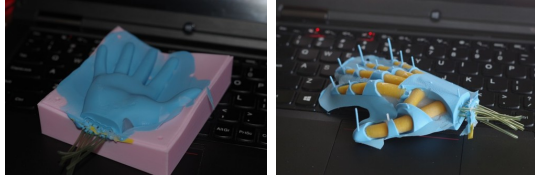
Main mould open and demoulded hand with de-gassing channels visible.
